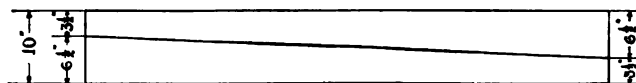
Showing How a 10-inch Plank is Cut Diagonally to Build Up the Centerboard to the Proper Shape
